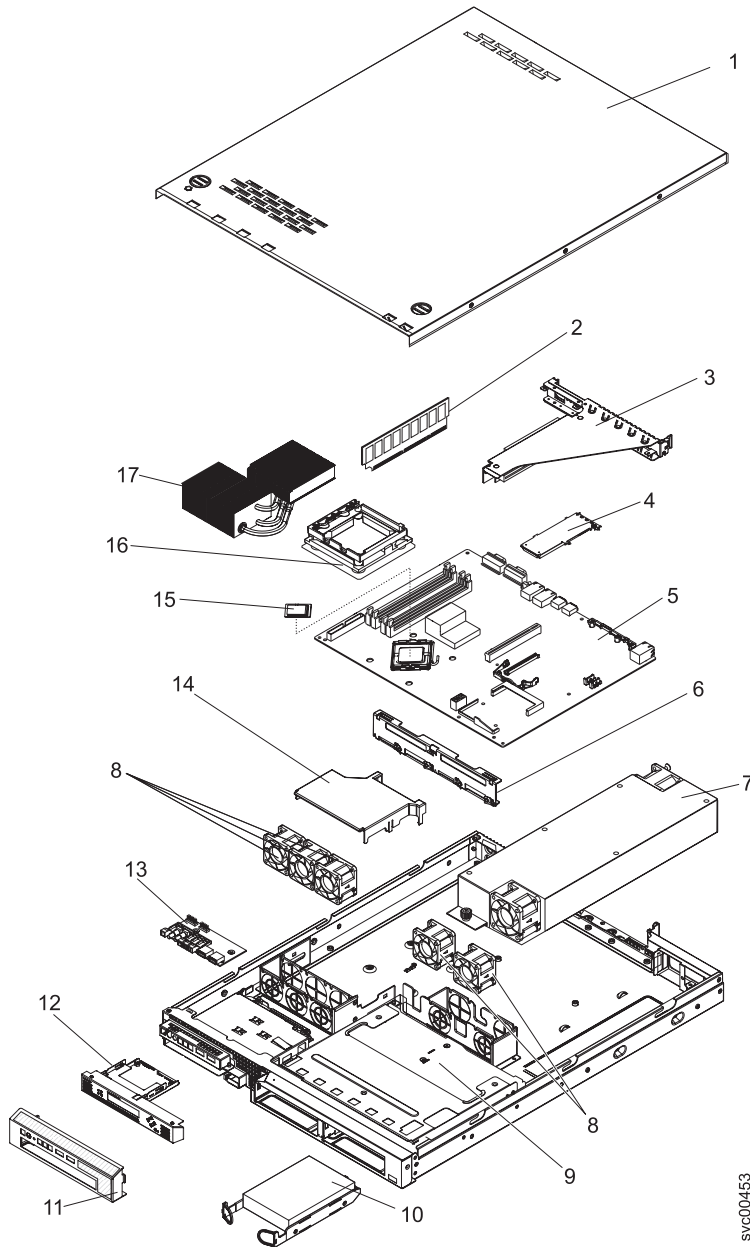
Exploded view of the SAN Volume Controller 2145-8A4 node
